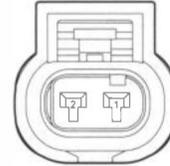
Front Exhaust VVT Phaser [270FE-2]
